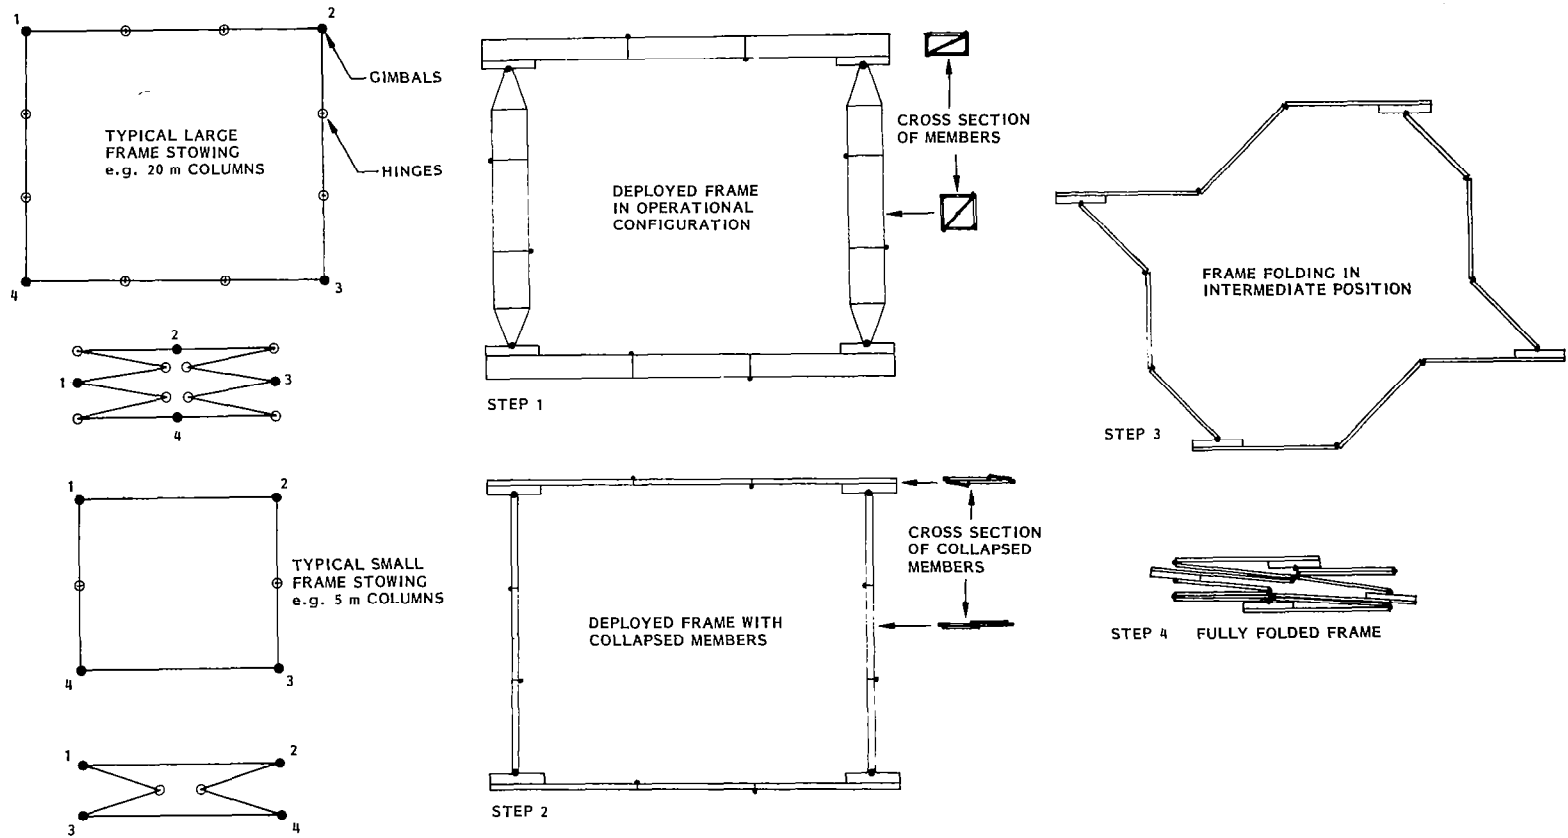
Schematic of Assembler Quadrangle Stowing Technique.
